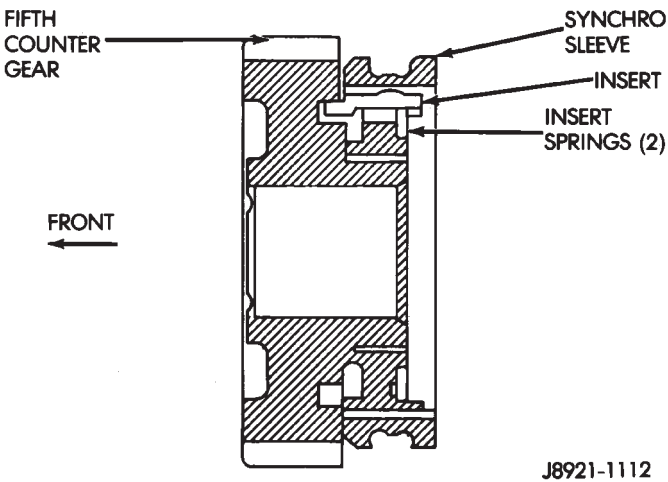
Assembling Fifth Gear And Synchro Assembly
